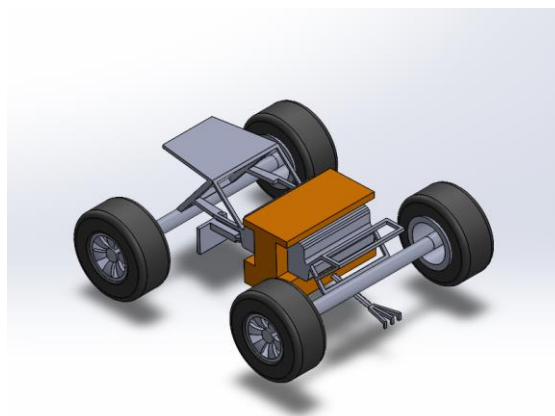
The assembly drawing of an Automatic Seed Sowing RC car
